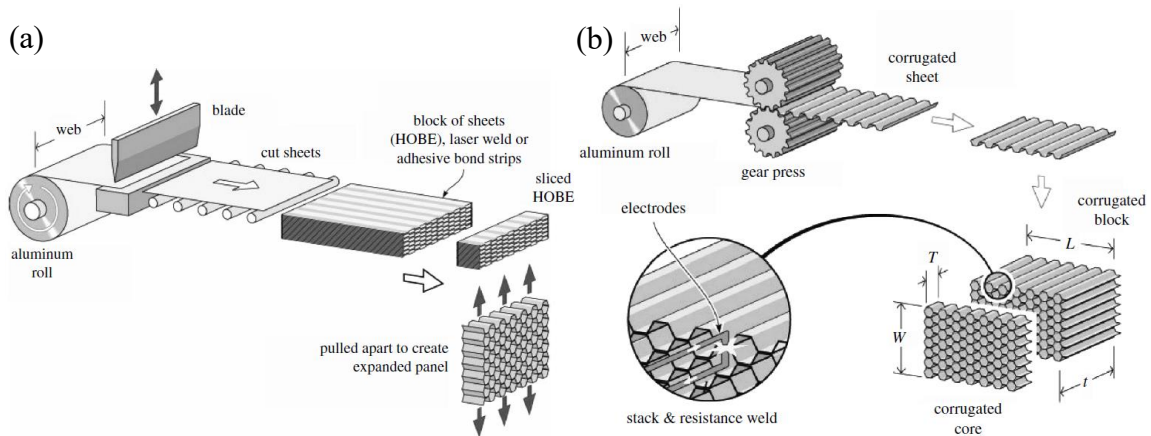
Two widely used honeycomb manufacturing processes. (a) Bonding-expanding process; (b) Corrugation-welding process. (reprinted from Haydn N.G Wadley, 2006) [10].
